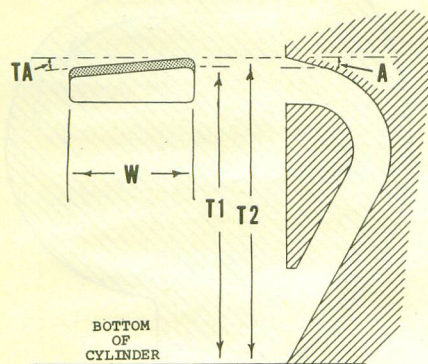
Raising the transfer ports will cause ports to open sooner. Angles of passage (A) and port (TA) direct fuel into cylinder and should be closely maintained.
